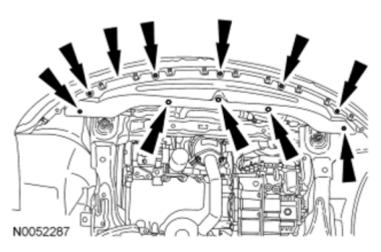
Locating Pin-Type Retainers Courtesy of FORD MOTOR CO.
